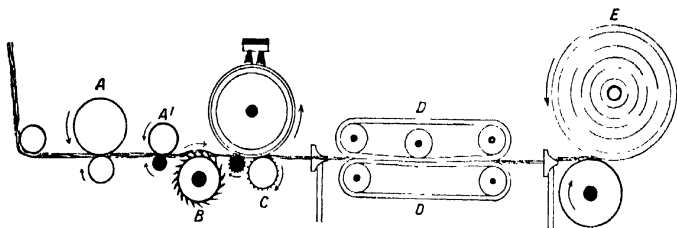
A. Enlarged View of principal parts in a French Drawing-box.
